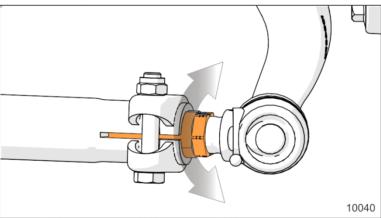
FINE ADJUSTER SLEEVE ON TIE ROD
